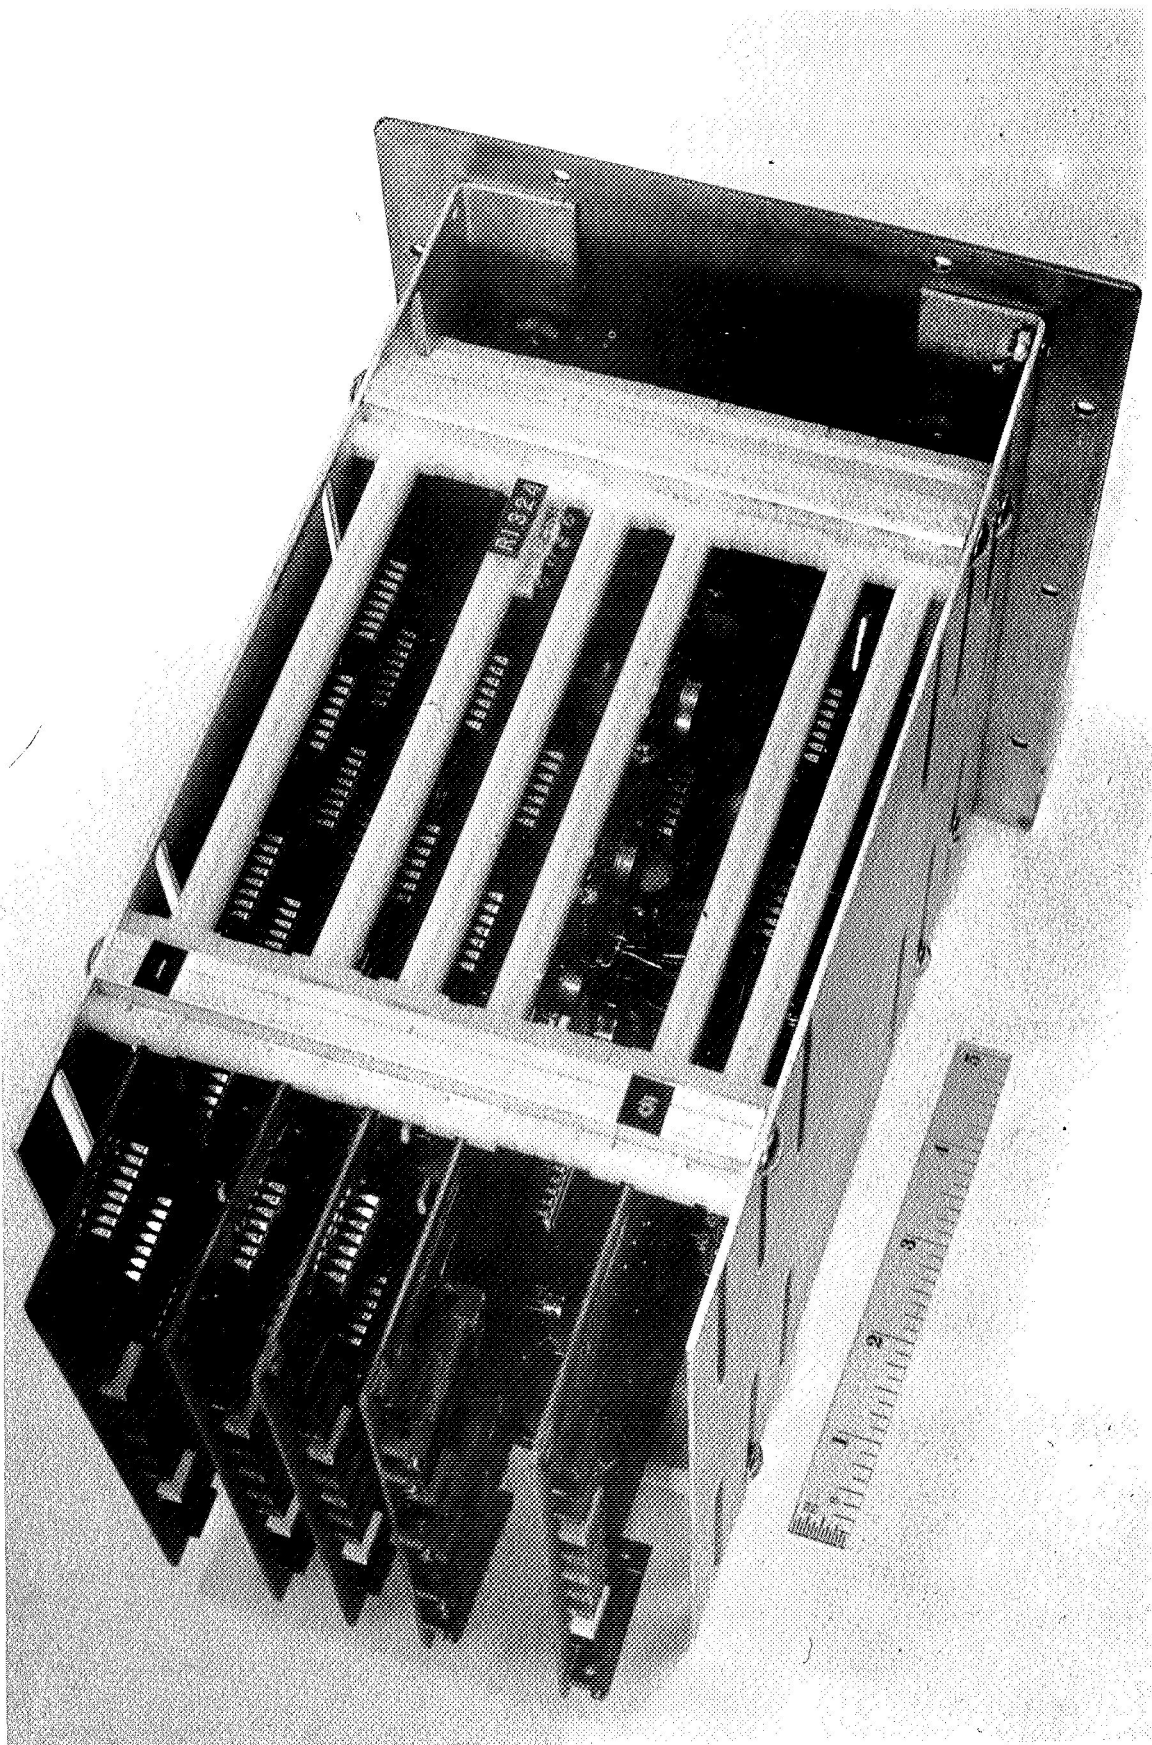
ASSEMBLED RESPONDER UNIT
